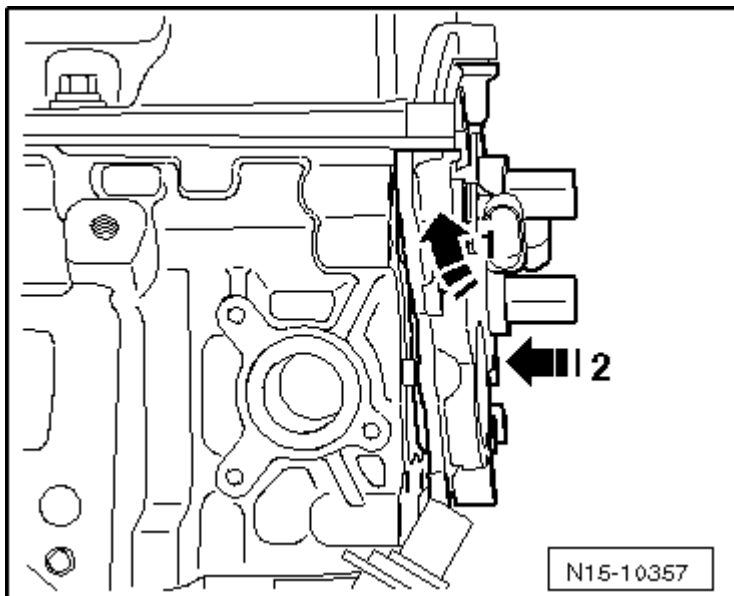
Pressing Cover Up And Under Cylinder Head Cover Seal, Then Pressing Cover Against Cylinder Head And Onto Alignment Pins
